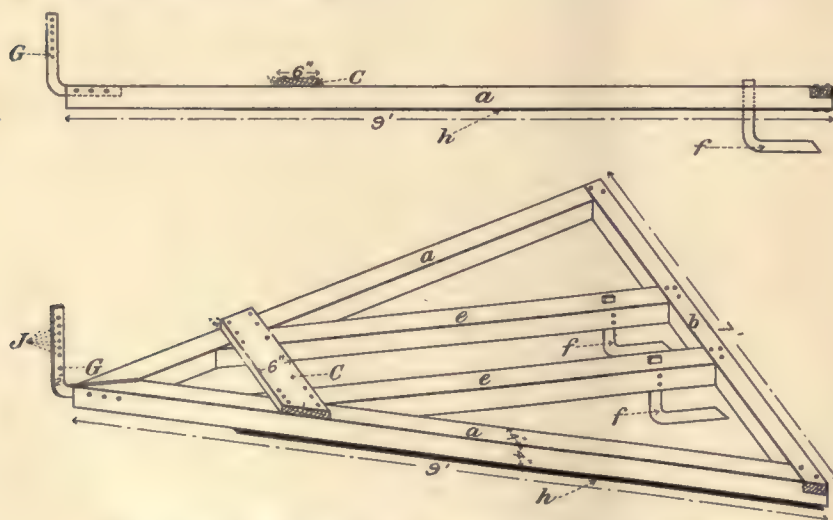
The V-shaped Cotton Stalk Cutter, Side View and Perspective.
